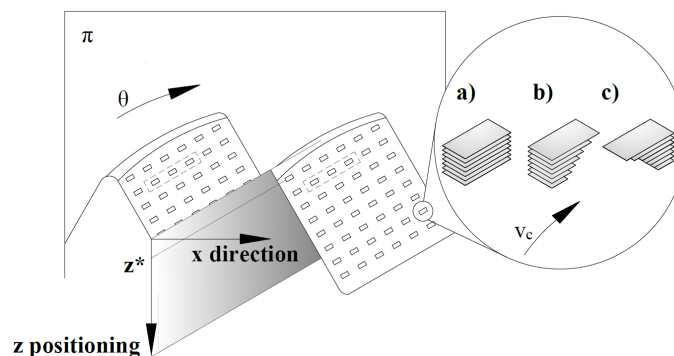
Schematic diagram of textures on a circular sector of the tapped tool. In the enlarged figure are shown the projected views of: a) flat bottom dimples; b) - c) positively (and negatively) inclined dimples with respect to cutting speed v_c .
